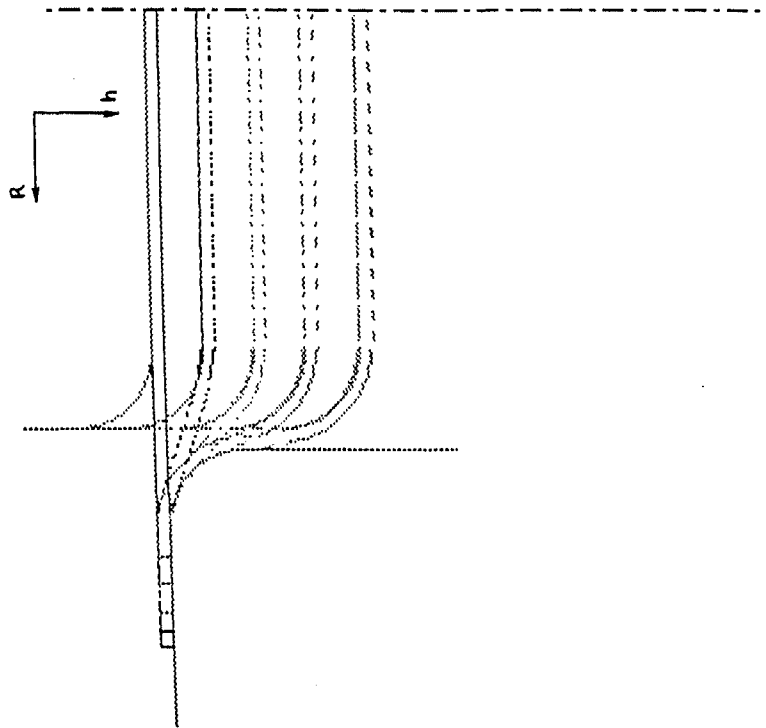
(b) Desired and obtained part drawings for the component in Example Part 3
